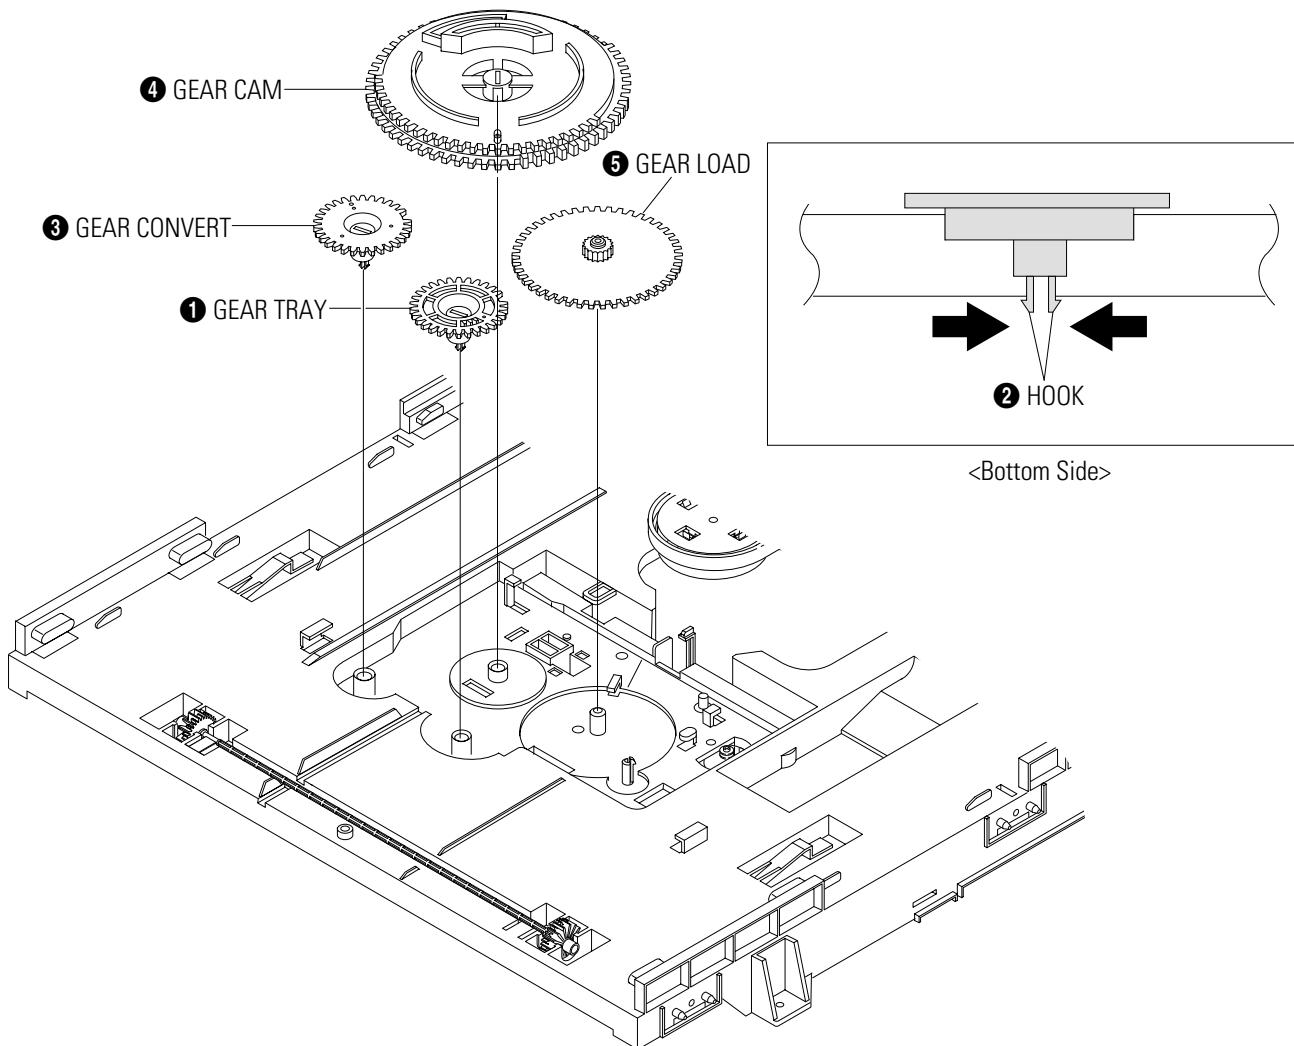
Gear Tray, Gear Convert, Gear Cam, Gear Load Removal
